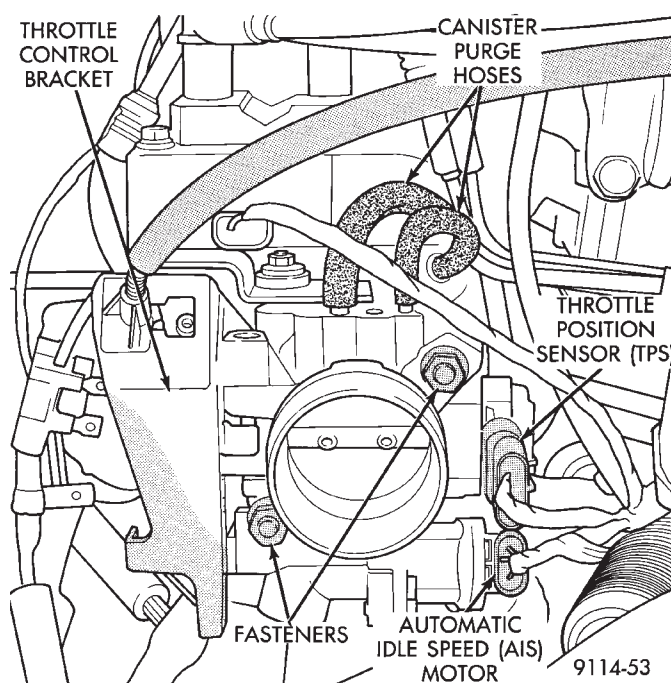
Automatic Idle Speed (AIS) Motor and Throttle Position Sensor (TPS) Wiring Connectors
